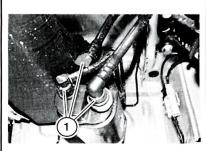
Unlock quick-release fasteners (1) on carbon canister and detach
